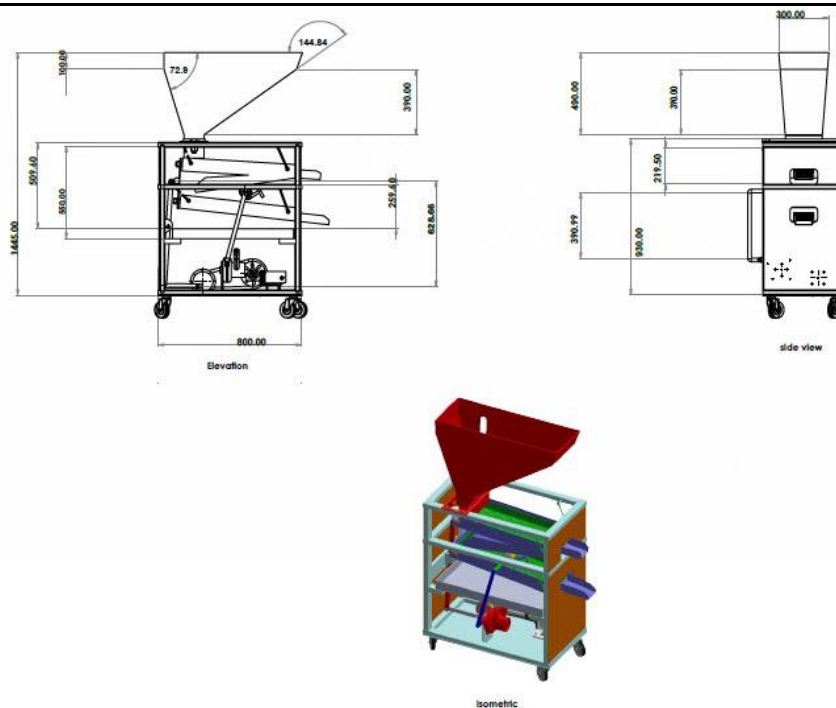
Sketch view of the cleaning machine (Dim. in mm)
